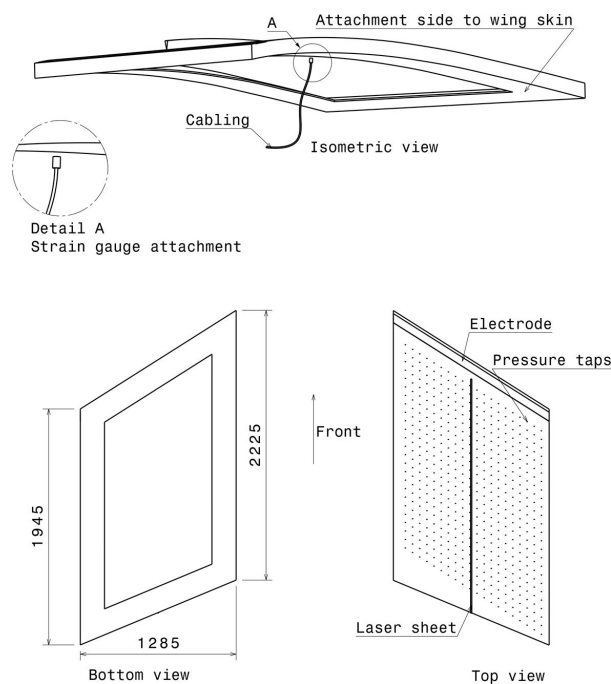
Example illustration of the geometry of a wing panel attached at wing section A. Dimensions shown are in mm.
